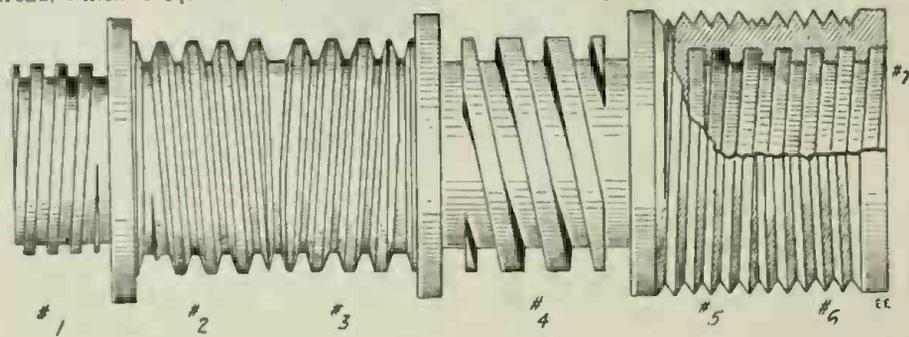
An Interesting Thread Model Showing the Various Kinds of Threads Which Can Be Cut on an Ordinary Machine Lathe, Including Square Threads, "V" Threads, Internal Square Threads, Et Cetera.
